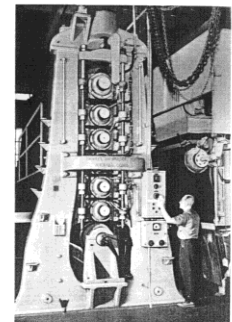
6-Roll as bottom roll for a Machine Calendar (Retrofit)
